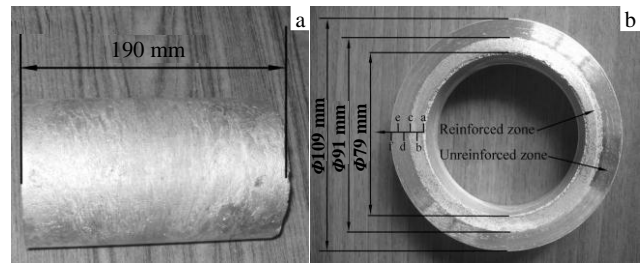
Composite tubular parts fabricated by centrifugal casting: (a) surface of tubular parts and (b) cross section of tubular parts
